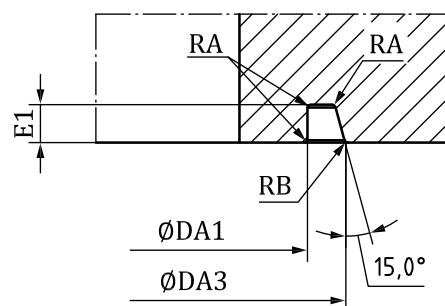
Nomenclatures for IX seal grooves for flat face flanges
